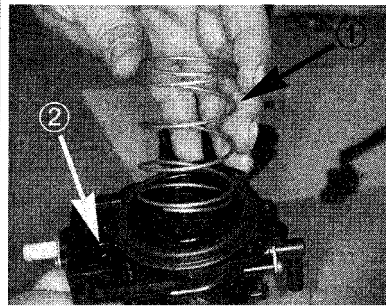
Position the large spring (1) and the vacuum passage O-ring (2) to the intermediate housing...
